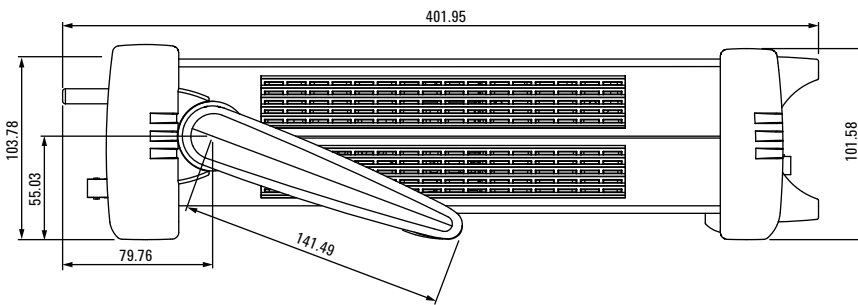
Dimensions (side view, with handle and bumper, in millimeters, nominal)
